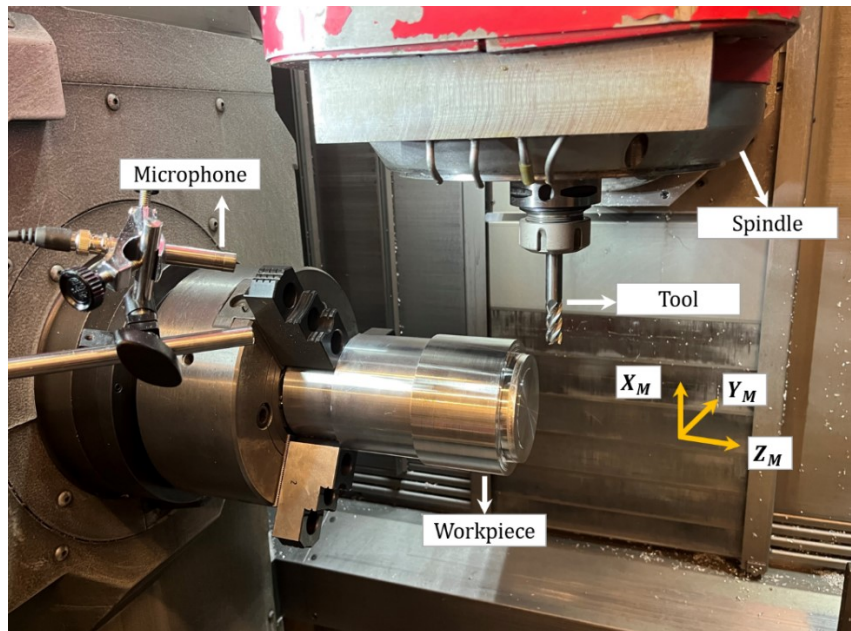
Experimental set-up for chatter identification in orthogonal turn-milling cutting tests.
